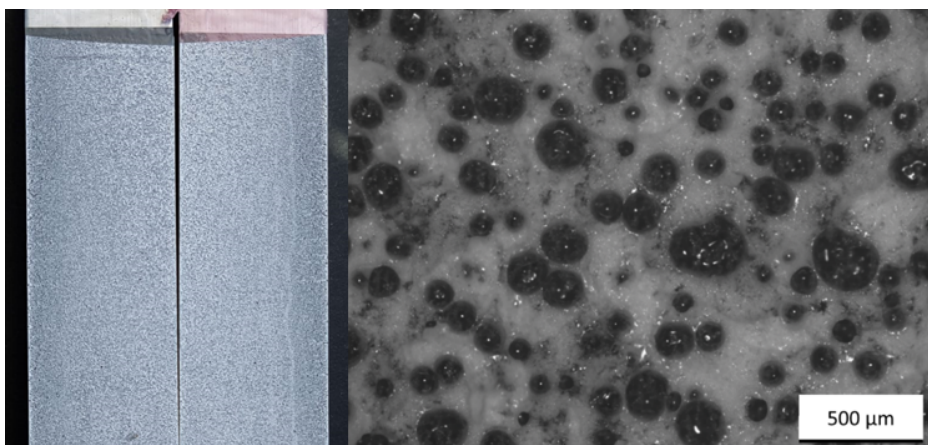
Fracture surface of a C-joint ablated with $ED=3.81 \text{ J/mm}^2$ and $H=50 \mu\text{m}$ [149]
